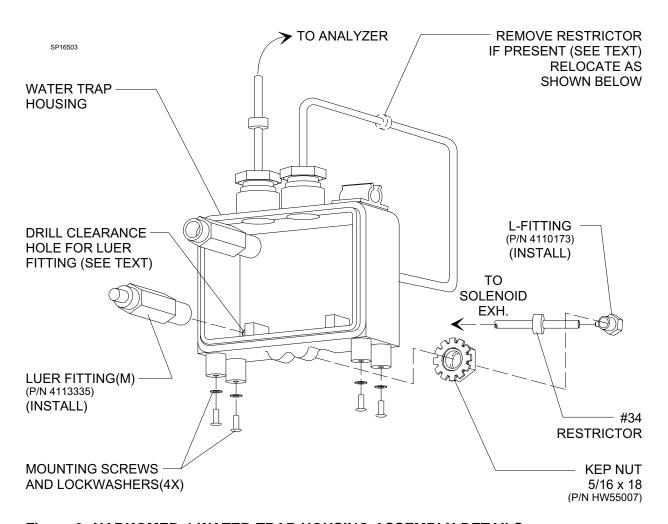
NARKOMED 4 WATER TRAP HOUSING ASSEMBLY DETAILS
